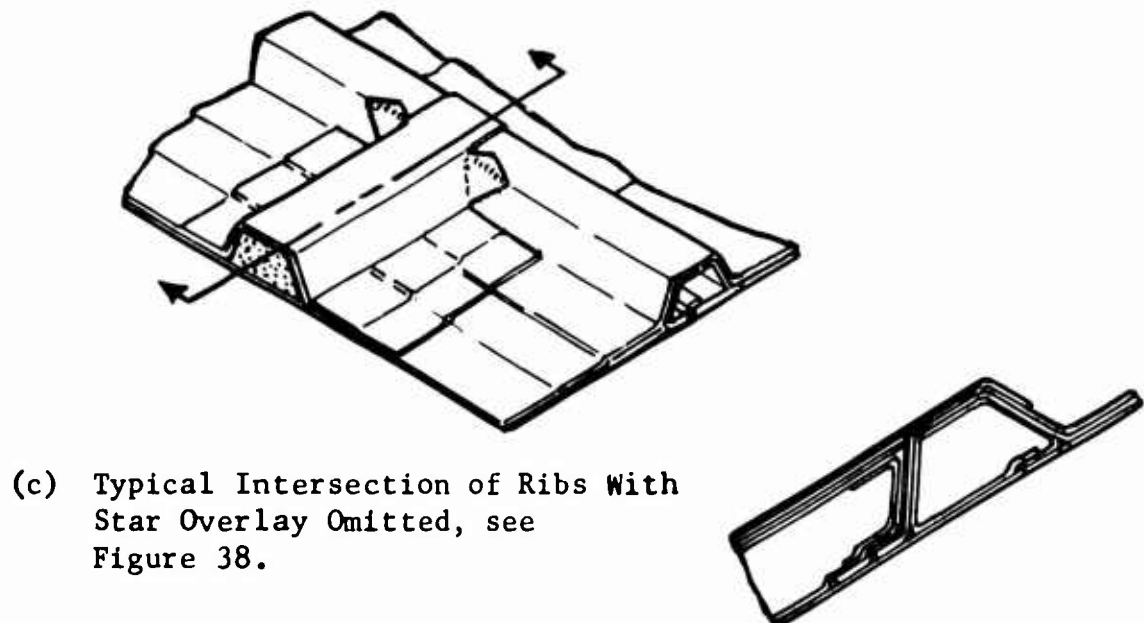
Showing Typical Joint Construction Used in the Manufacturing of the Dome.
